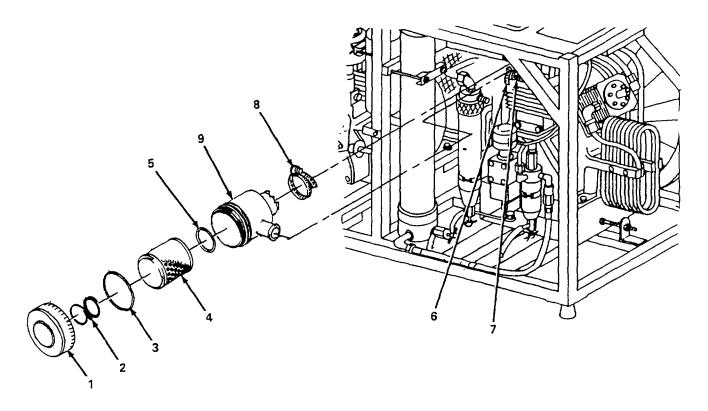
Inlet Filter and Adapter Assembly, Service.
